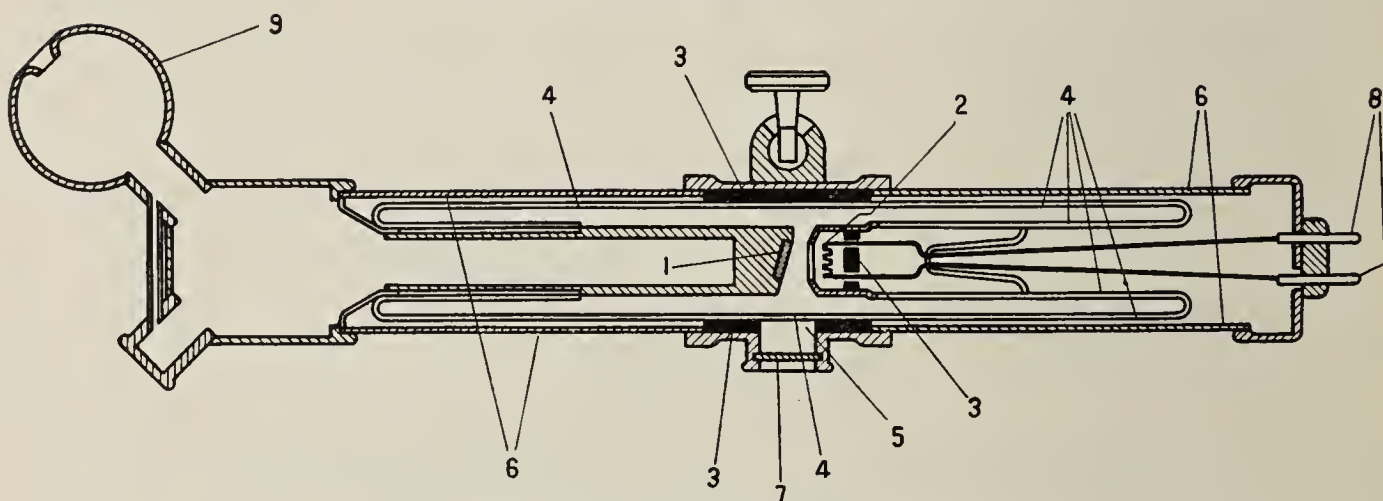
SECTION OF PHILIPS METALIX TUBE.
